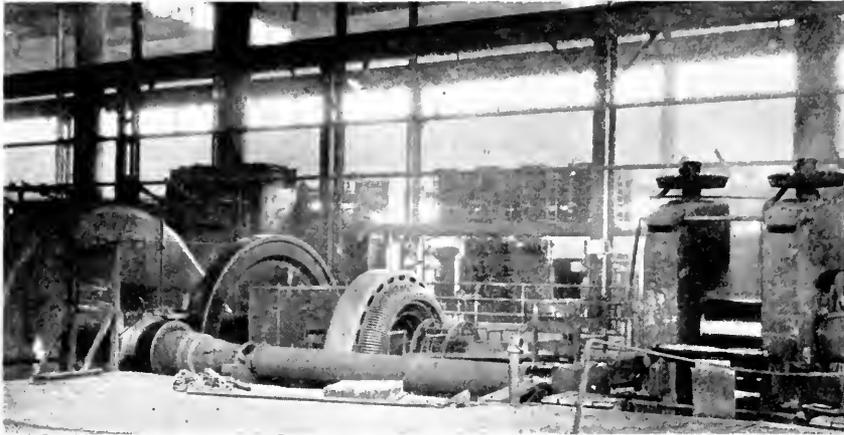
Typical Location of Flywheel for Geared Mill Drives. The other flywheel identical to the one shown in the picture is mounted on the opposite side of the pinion shaft
